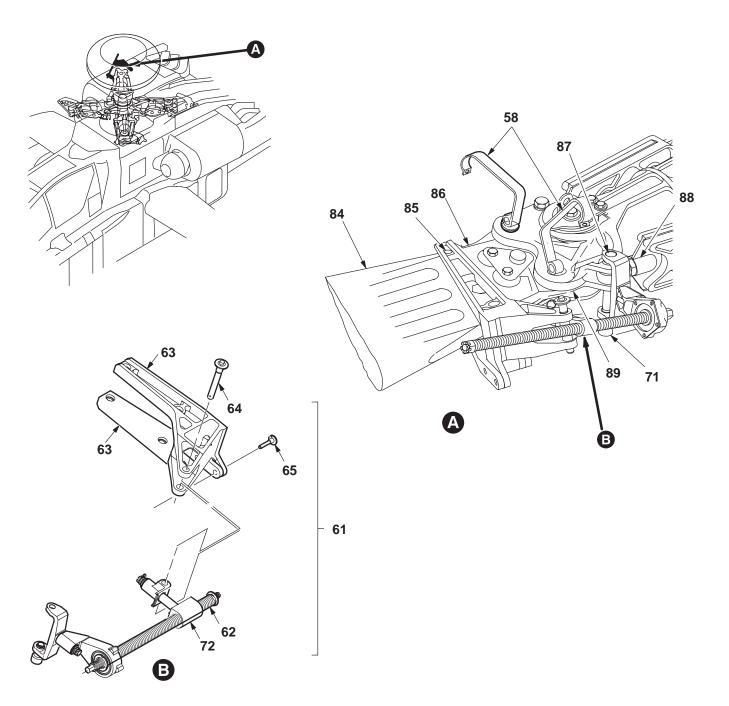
Blade Positioning Assembly on R/H AFT Main Rotor Blade
